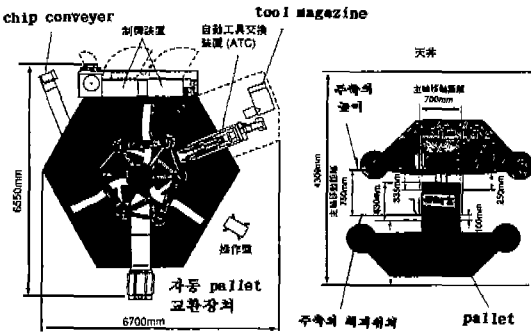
Giddings & Lewis Co's machining center based on parallel mechanism
